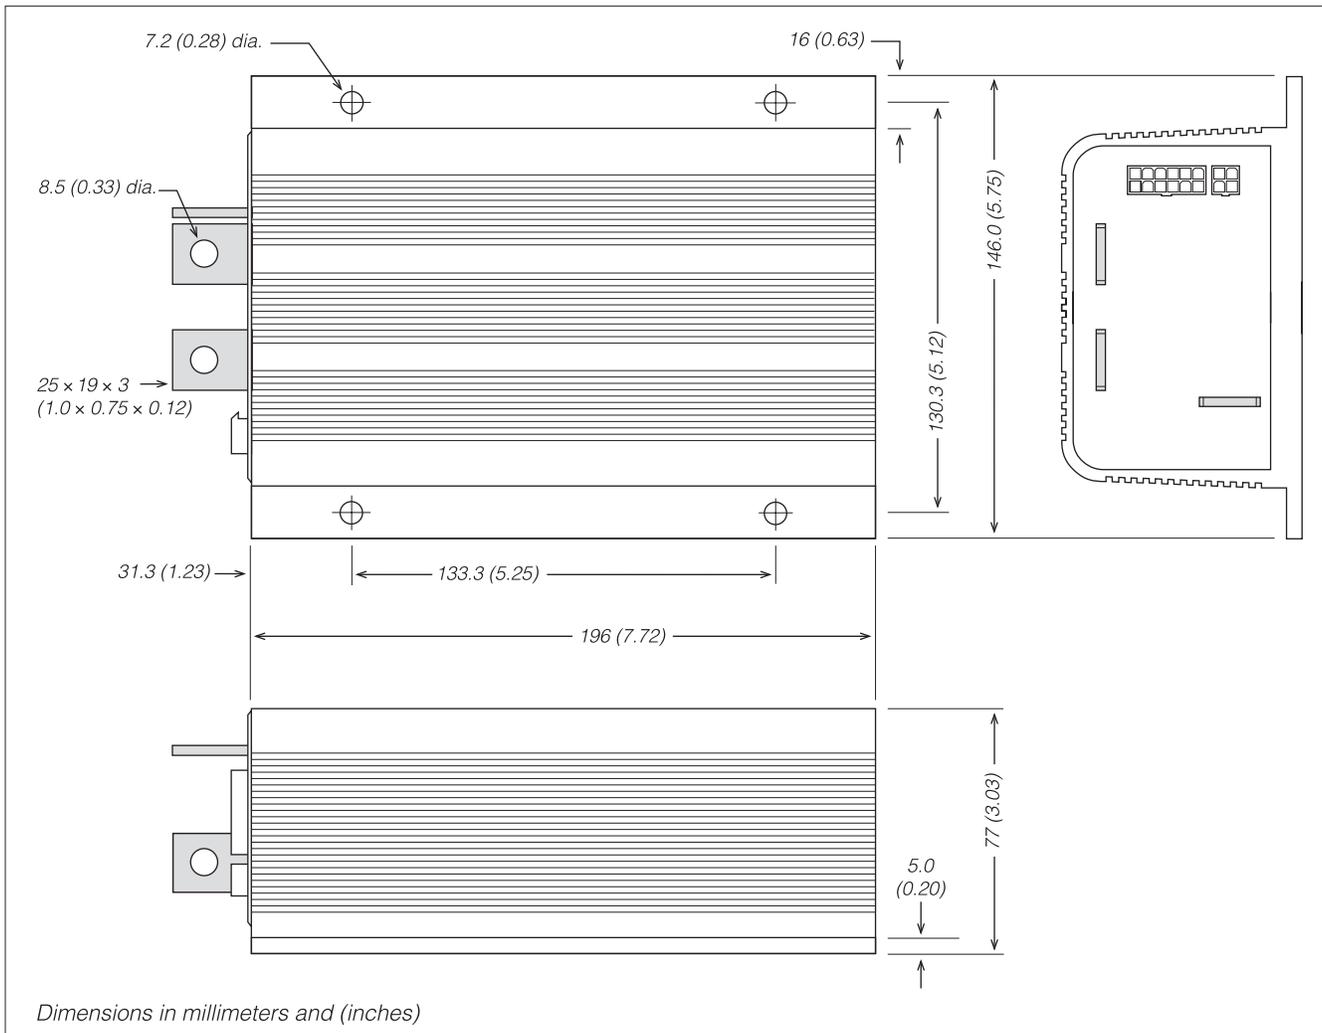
Mounting dimensions, Curtis 1253 controller.
